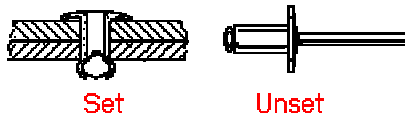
POP rivets before and after setting. Courtesy Emhart
